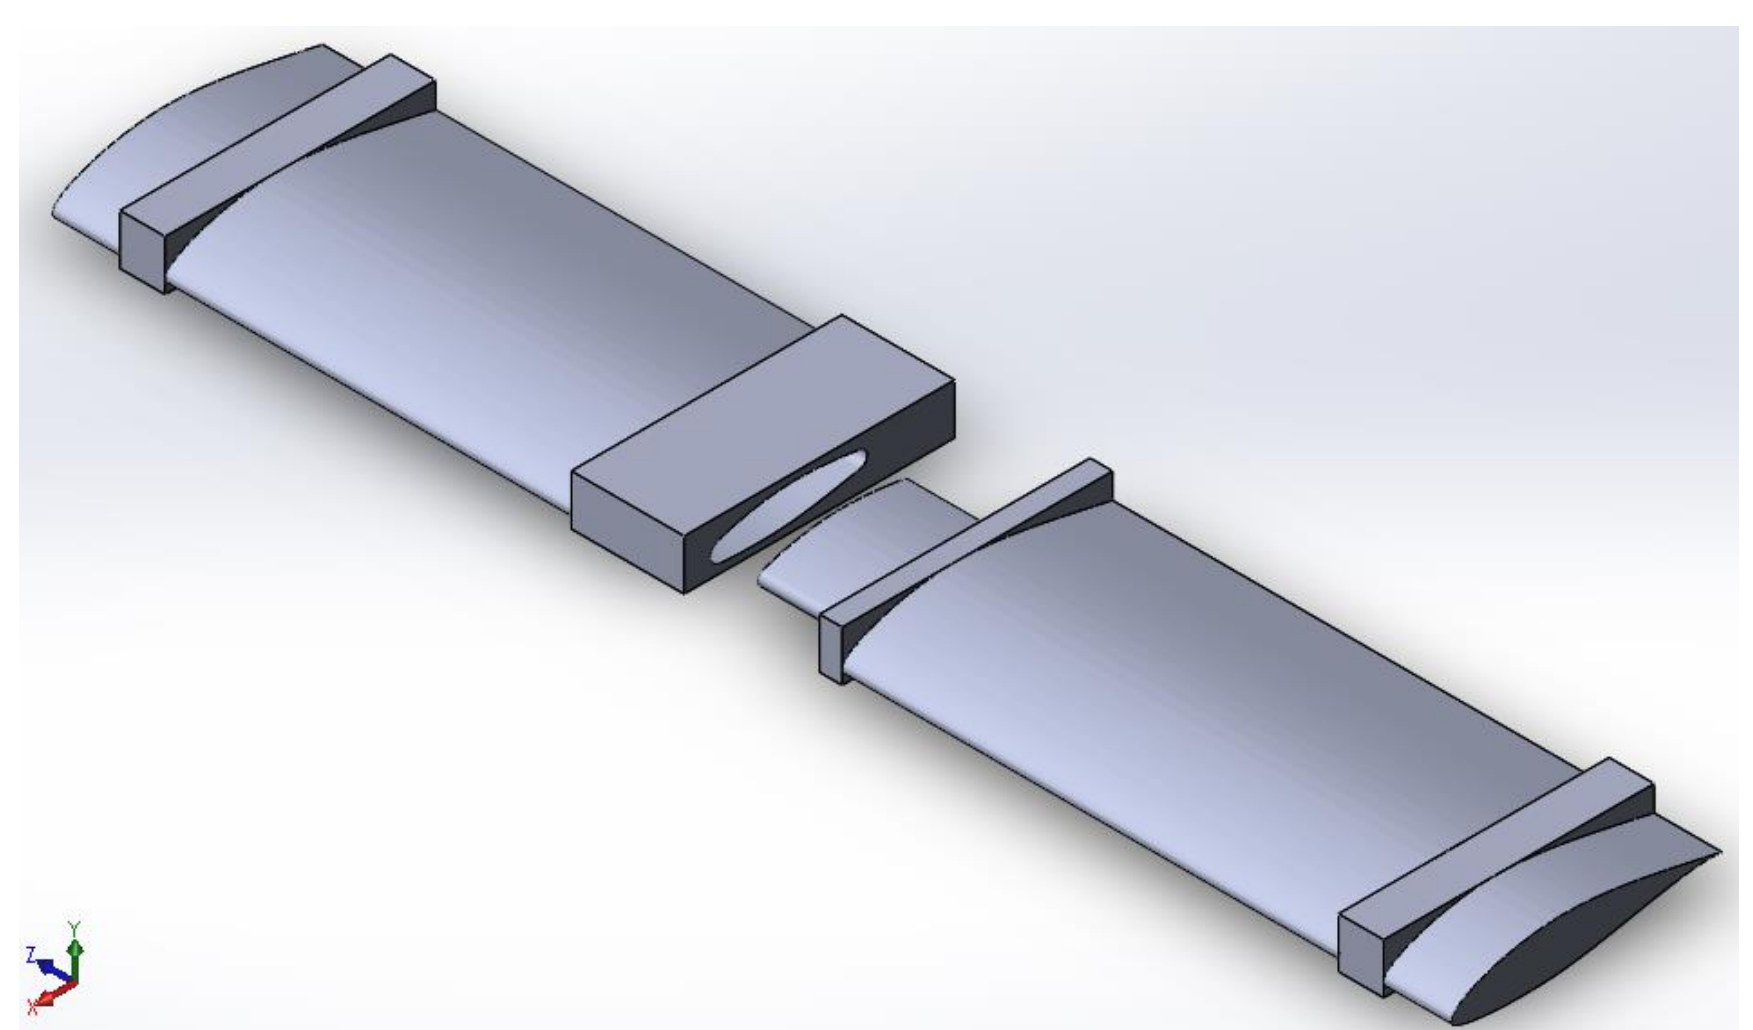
SolidWorks 3D Model of Segmented with Shaft Sample
